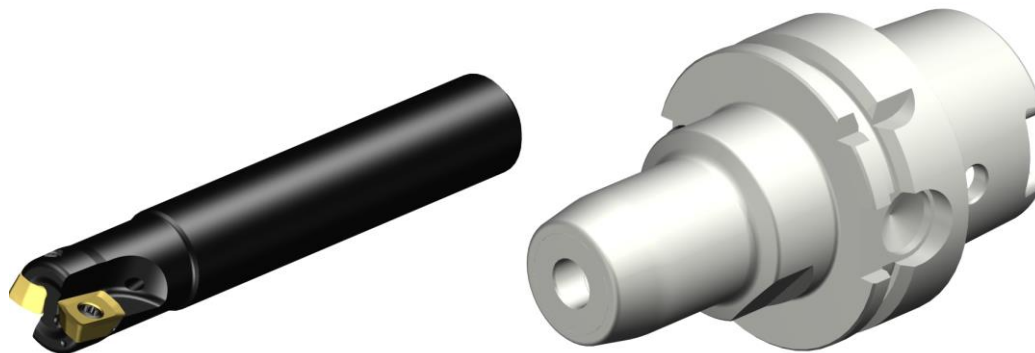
R390-010A09L-07L square shoulder milling cutter and 930-HA06-S-10-080 tool holder [41], [42].
